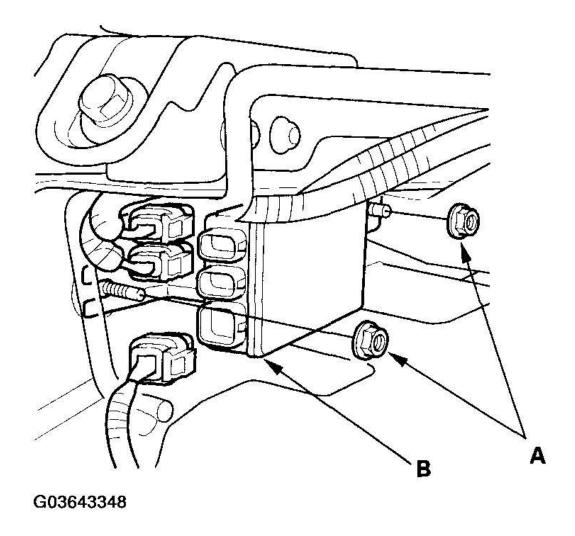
Removing Mounting Nuts And Front Passenger's Weight Sensor Unit From Seat Riser Courtesy of AMERICAN HONDA MOTOR CO., INC.
